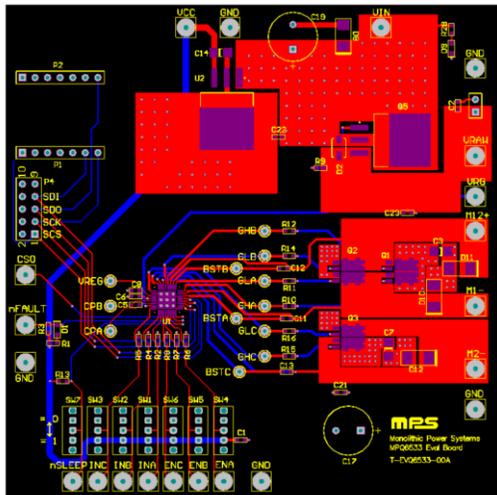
Recommended PCB Layout with Dual N-Channel MOSFETs
